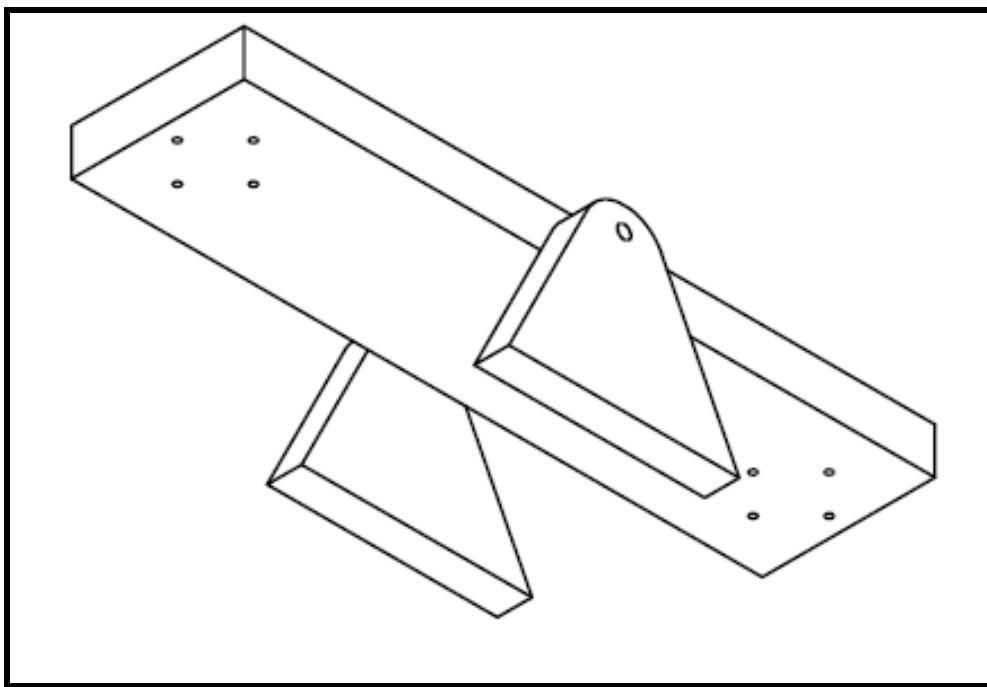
(b) Oblique view of chassis (showing fixed pivots)
